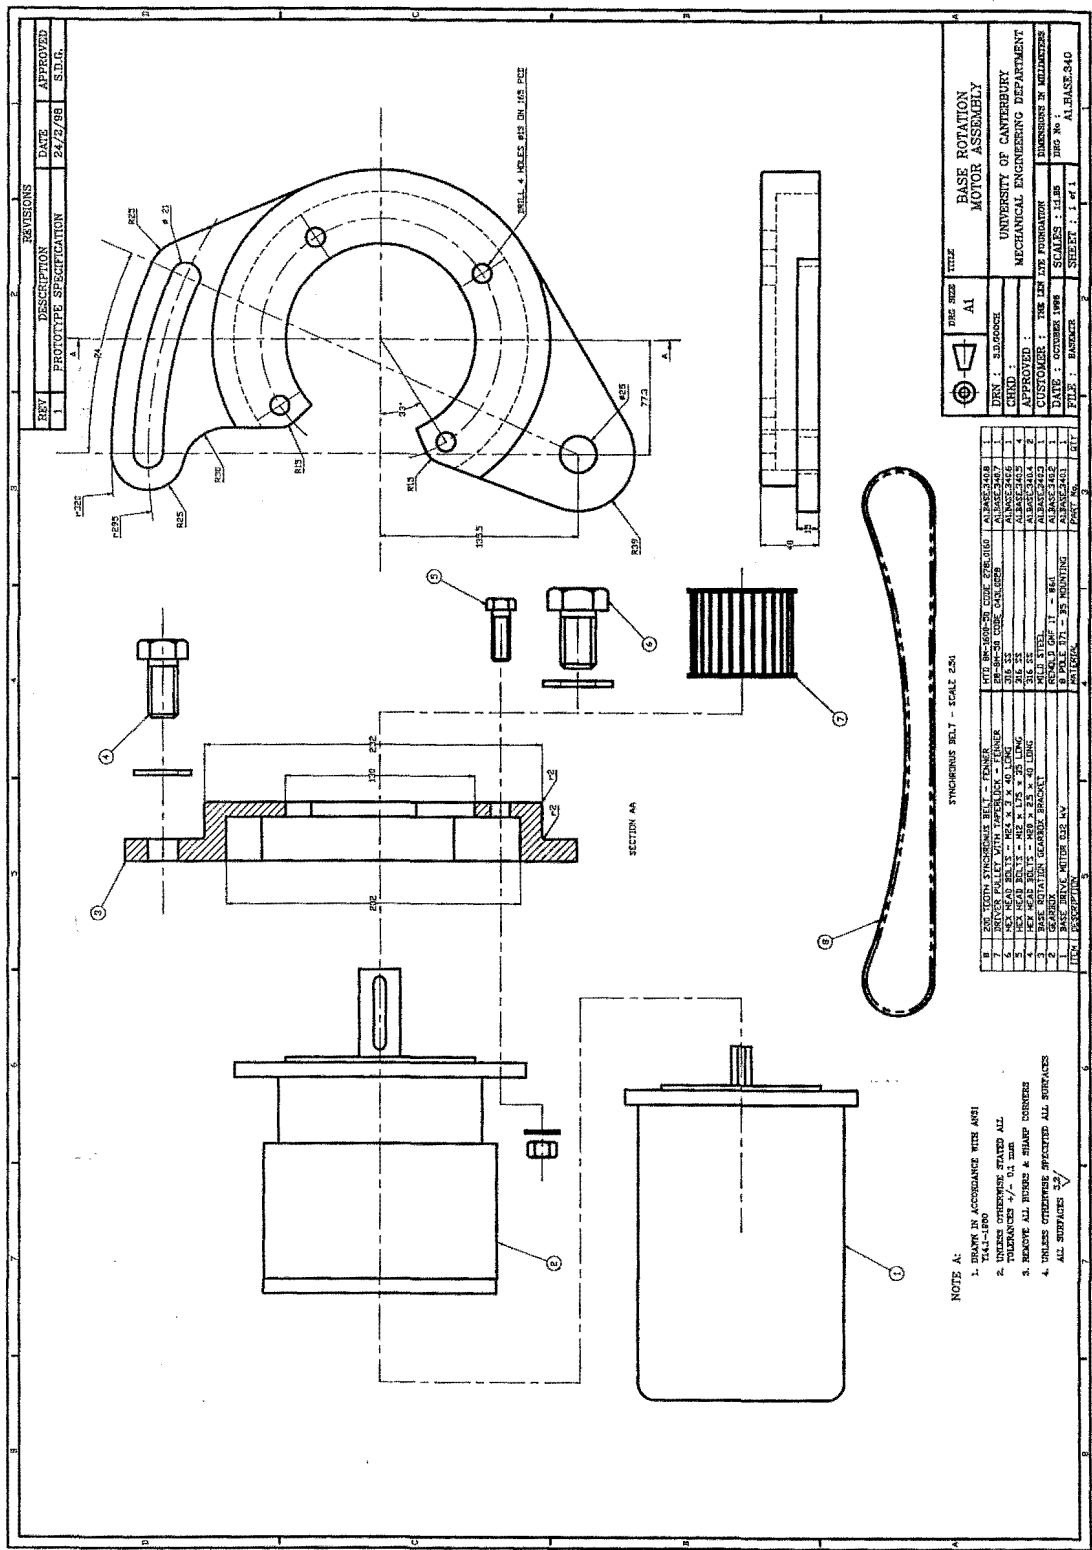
Manufacturing drawing for the base rotation motor bracket,
